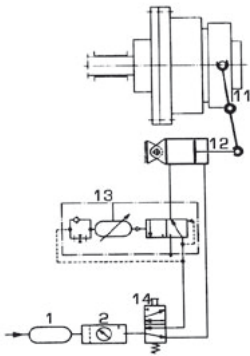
pneumatical - mechanical operating device of a Conax®-clutch, type CM, hand actuated and with automatic release of the operating system:
